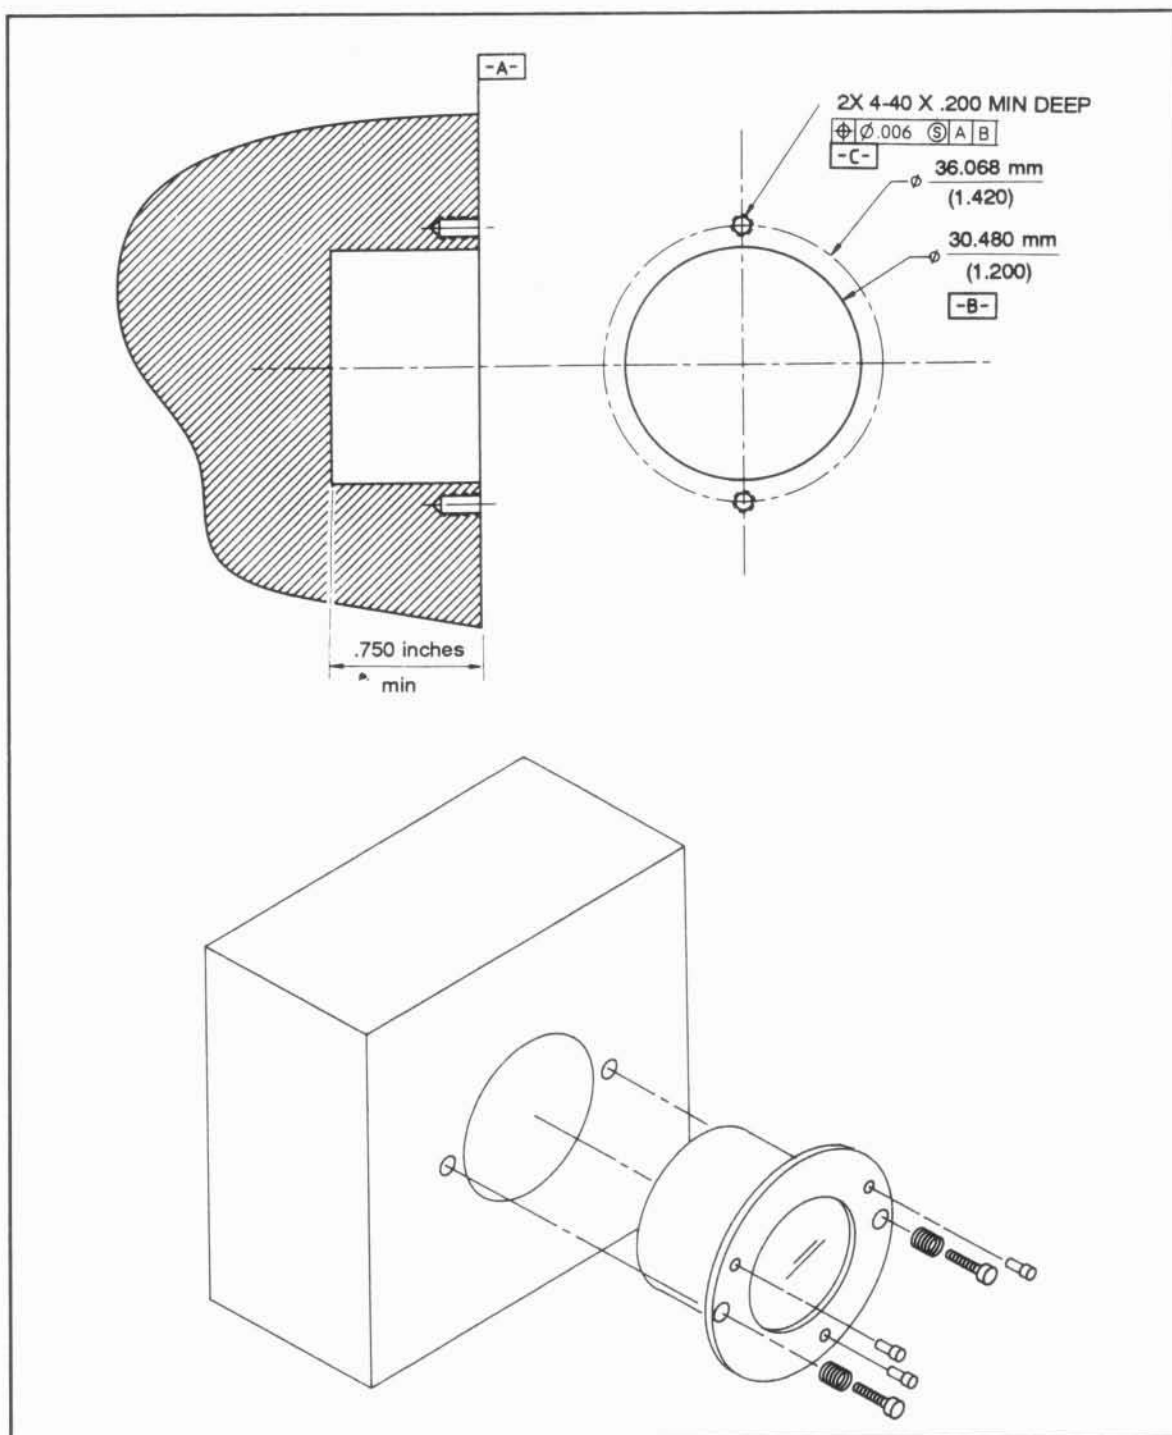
HP 10724A Mounting Requirements and Installation Drawing
